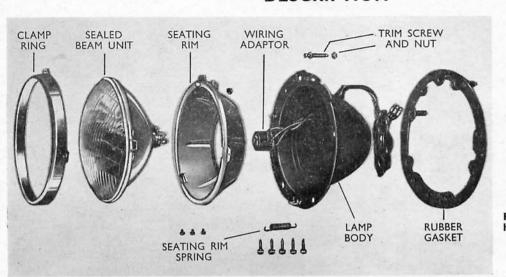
Exploded view of head lamp with sealed beam light unit
